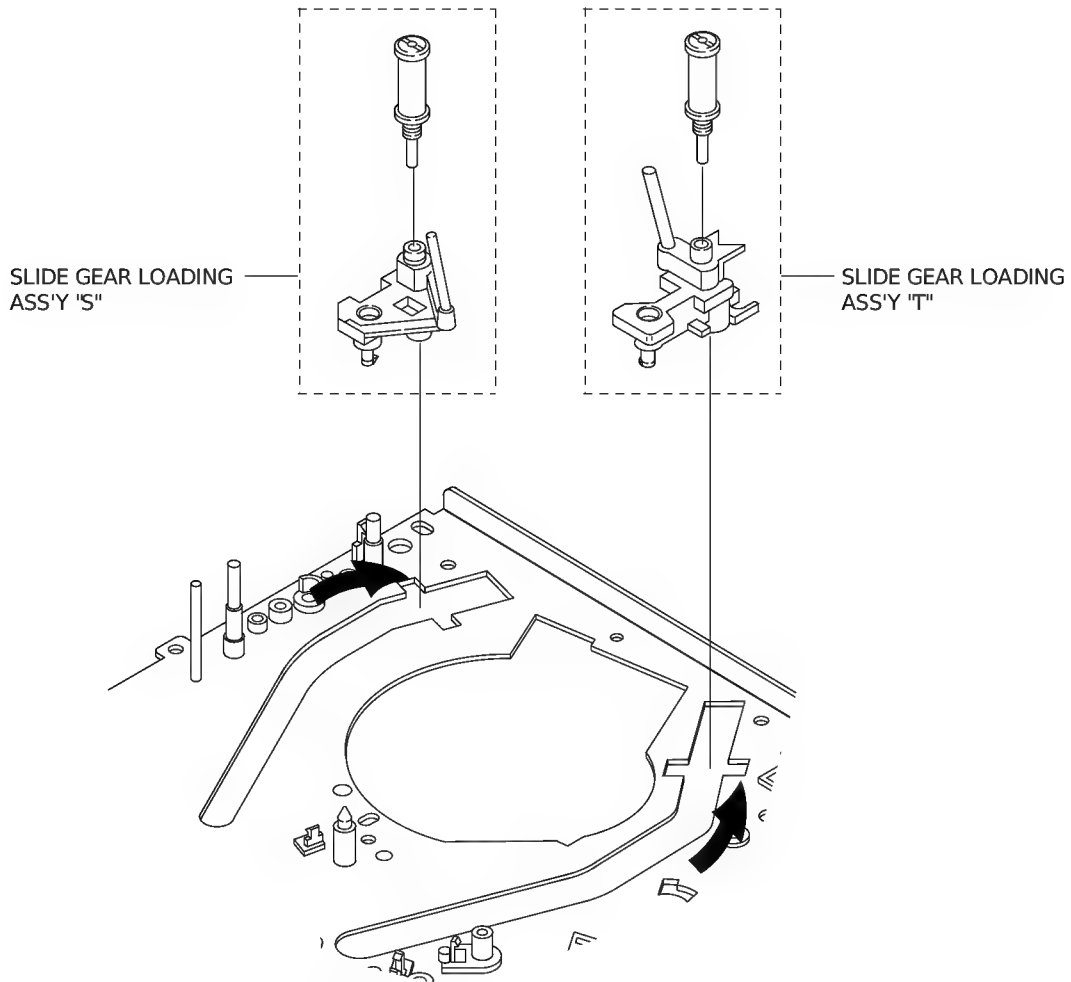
Slide Guide Roller "S", "T" Ass'y Removal
